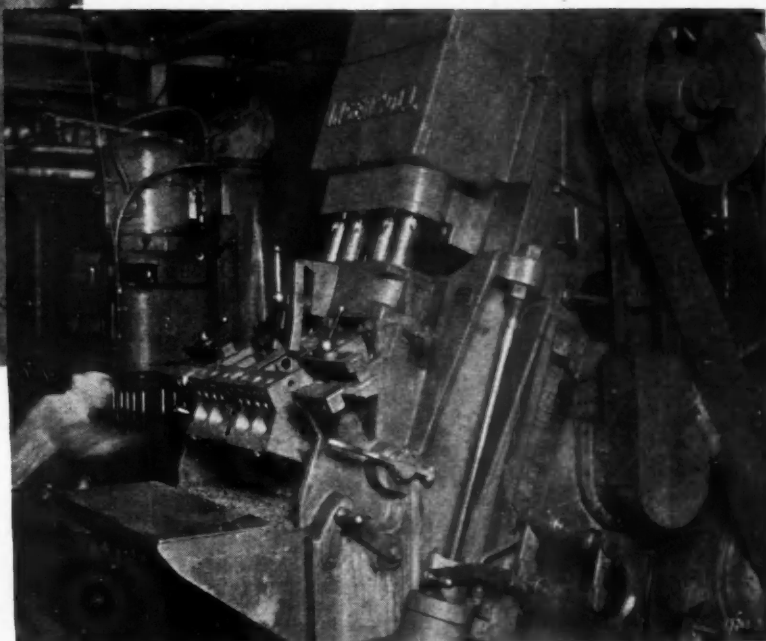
Rough boring cylinder bores on four-spindle Ingersoll, with inclined head
